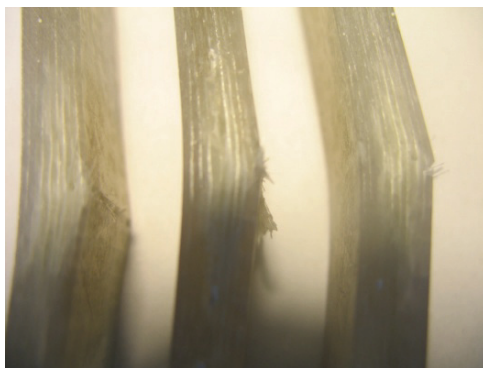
Failure area of some specimens reinforced only with E-glass fibres, after flexural test
